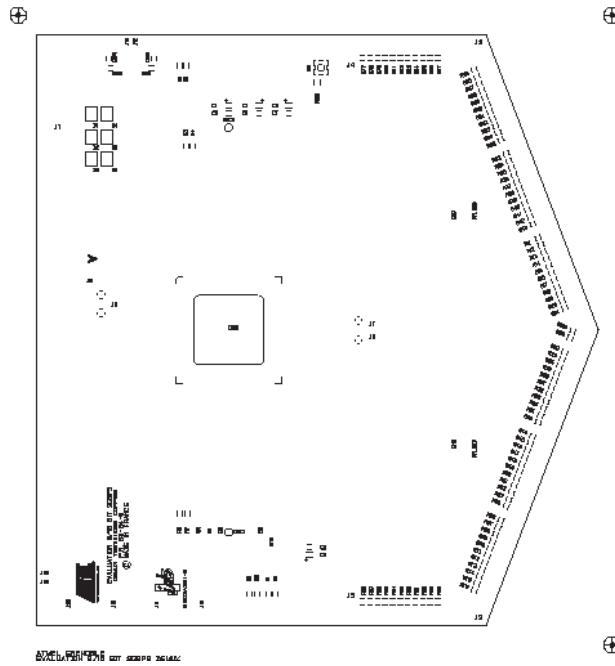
TSEV81102G0FS Component Layer (Bottom)
